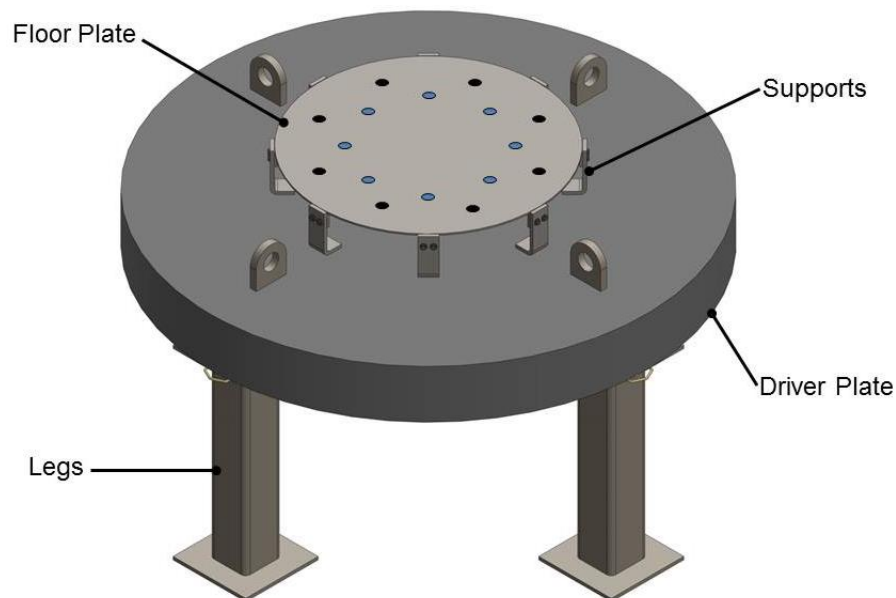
Explosively-Driven Test Rig with Gauge Mount Locations
